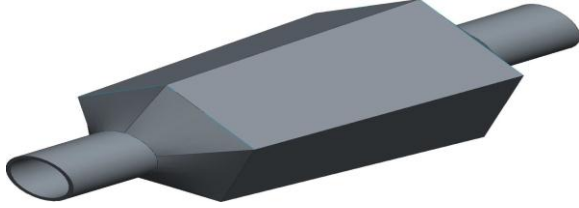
Three Dimensional View of Pentagonal Heat Exchanger.
